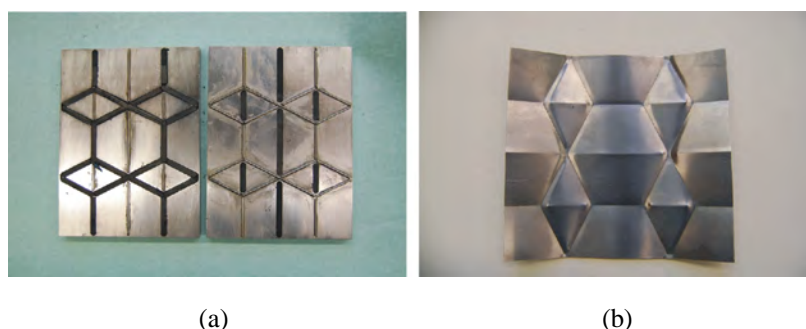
(a) Moulds for stamping, and (b) a stamped steel sheet.
